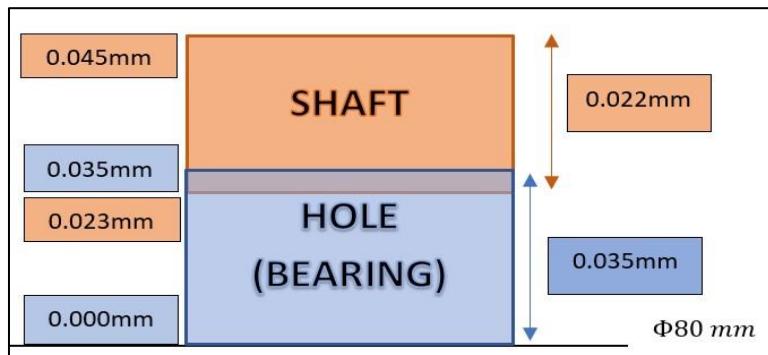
Selected Tolerance Fit Assembly for Bearing & Main Casing
